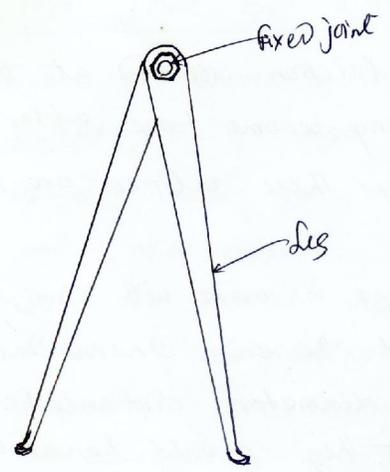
~~inside~~ Firm joint type inside caliper
